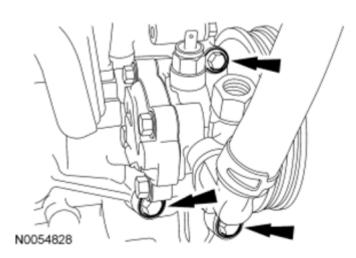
Locating Power Steering Pump Bolts Courtesy of FORD MOTOR CO.
